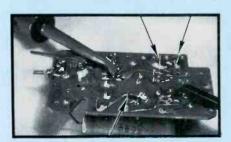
Where power-on tests must be made but there is a lack of room, solder short, right-angle pieces of solid wire to all testpoints and then attach a hook probe to them in sequence. Arrows point to several added wires.
